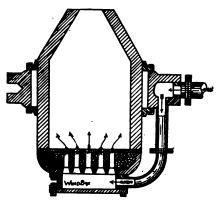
SECTIONAL VIEW GF A BESSEMER CON-VERTER
